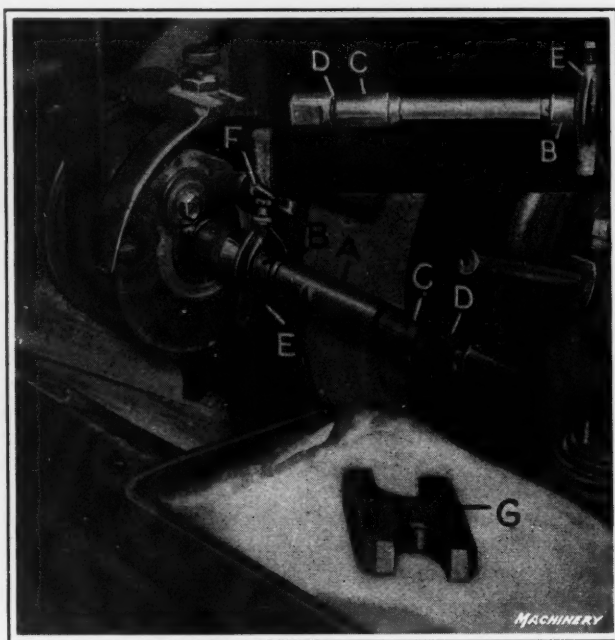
Plain Grinding Machine equipped for grinding Outside of Wrist-pins
